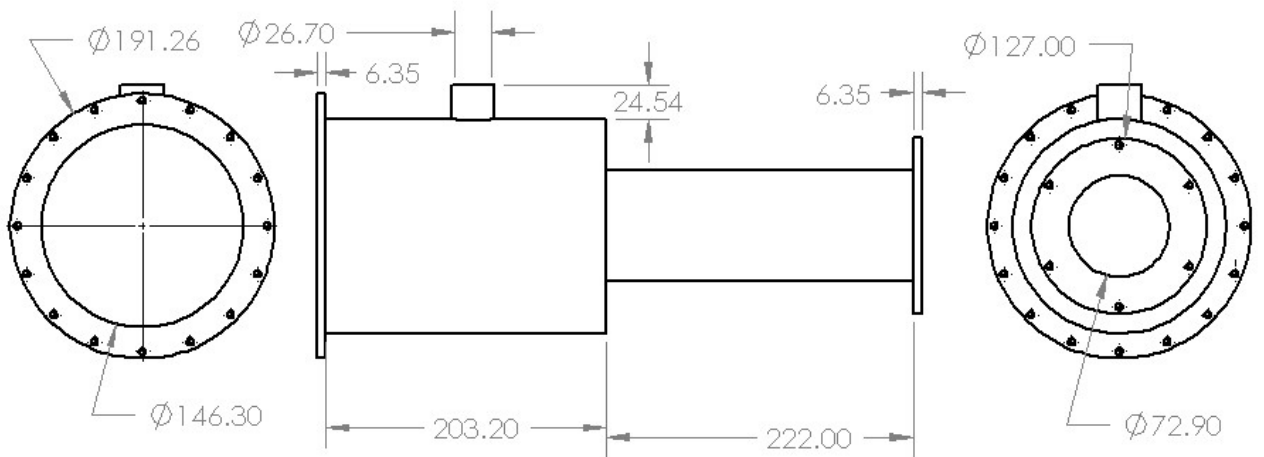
CAD drawing of Outlet/Exit section (dimensions)
